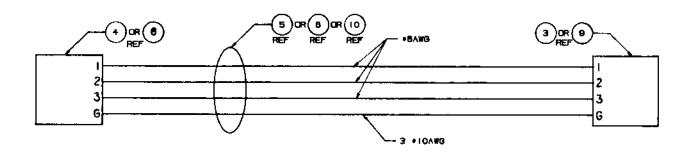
Cable Assembly, Electrical (Sheet 1 of 2)
